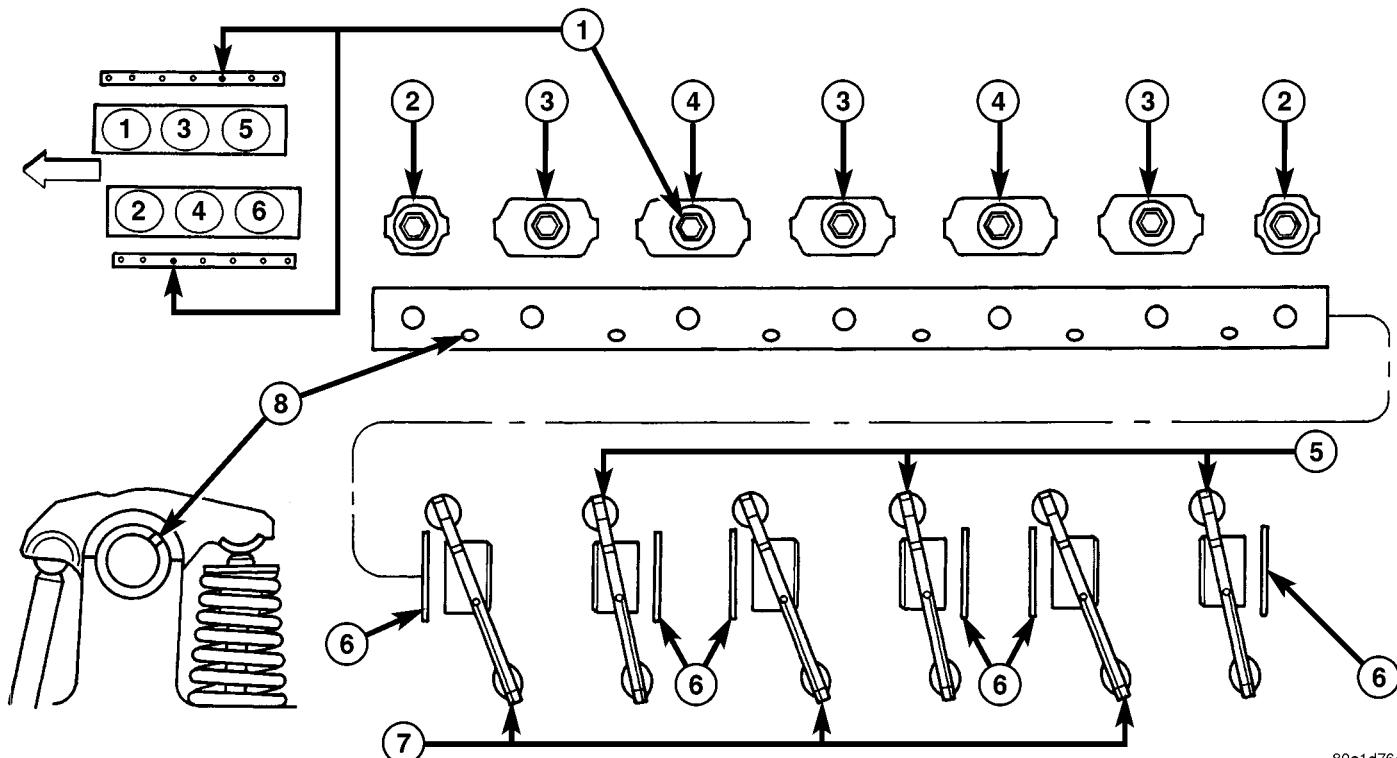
ROCKER ARM RETAINER - REMOVAL
